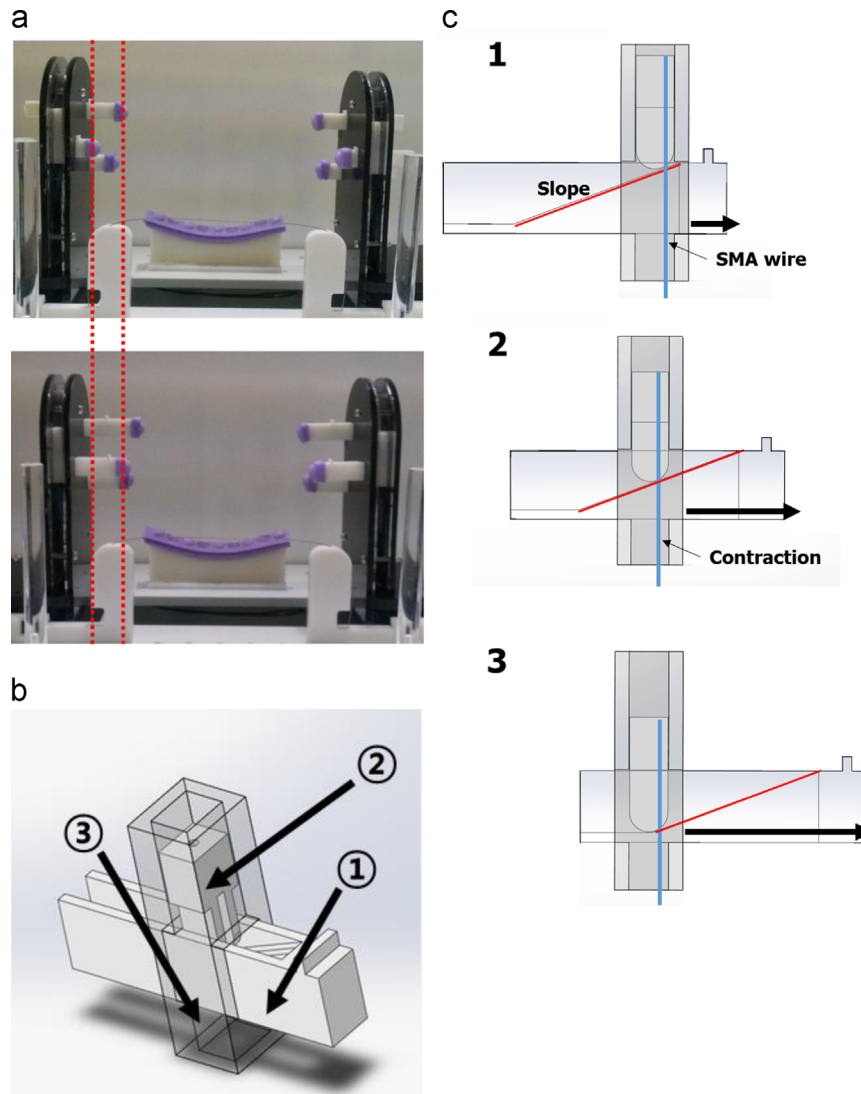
(a) Manufactured prototype, (b) detailed component configuration of point-type head fix and (c) contraction-sliding mechanism of point-type head fix. (① pointer, ② upper bar and ③ SMA wire binder).
